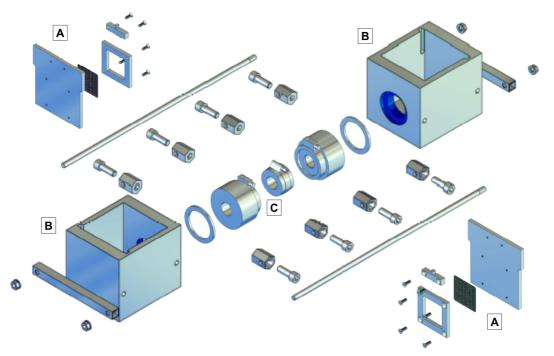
Schematic exploded assembly drawing of the core holder / cell for SIP measurements. (A): current electrode holder with platinum net electrodes; (B): acrylic glass electrolyte reservoirs; (C): potential electrode adapter for silver chloride ring-electrodes and core holder sleeve.
